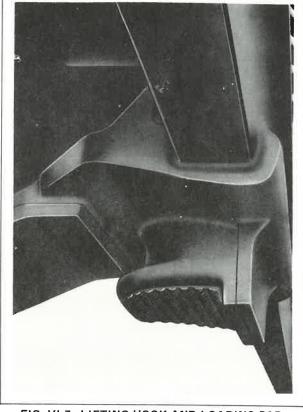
LIFTING HOOK AND LOADING PAD.
